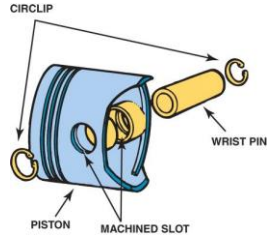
Circlips hold full-floating piston pins in place.
